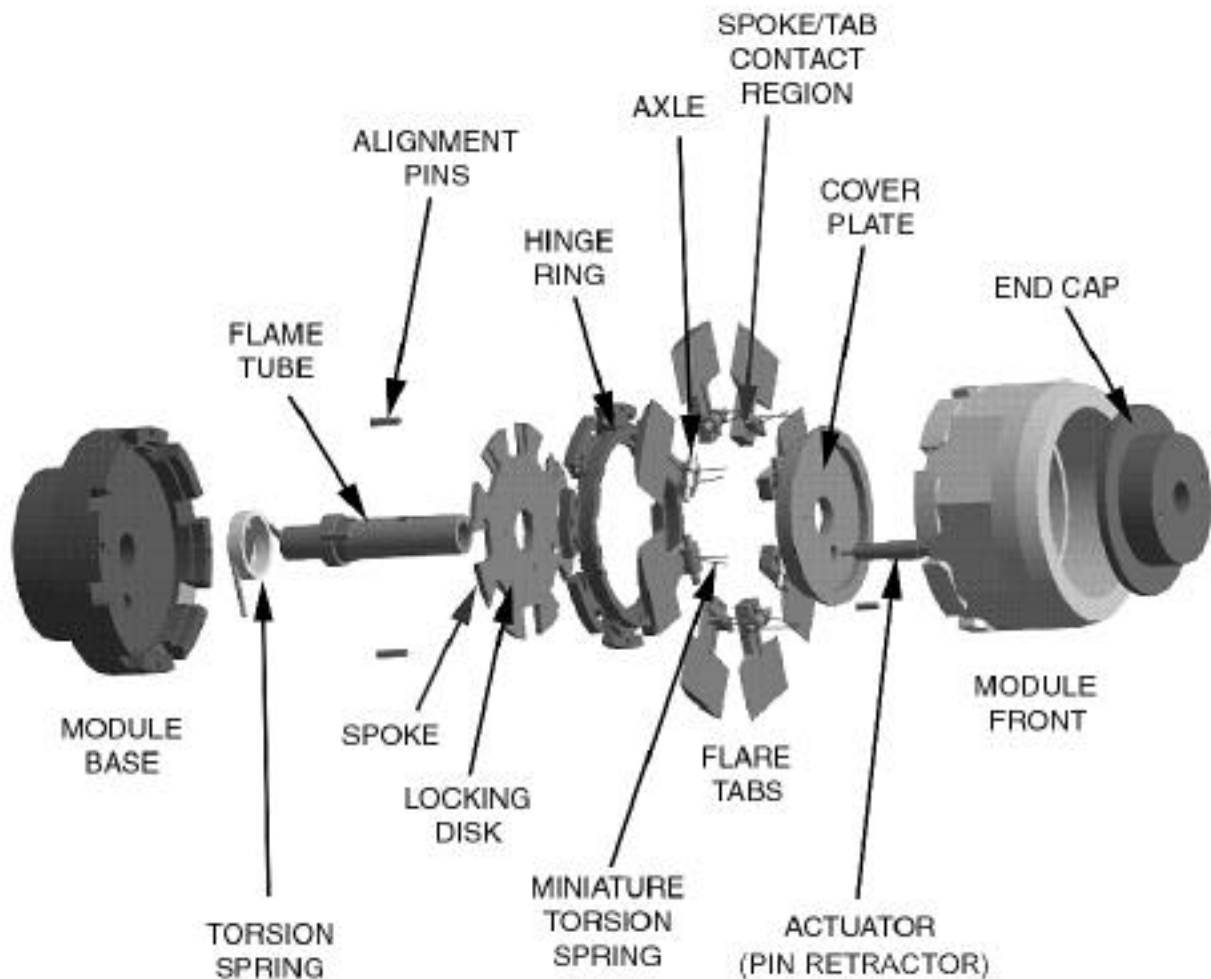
The Exploded Assembly View of the Prototype Range Correction Device for a Mortar.
